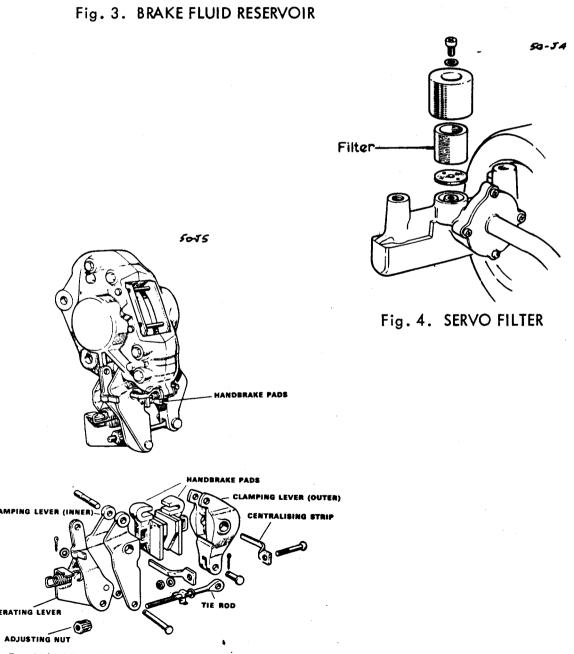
HANDBRAKE CALIPER COMPONENTS
